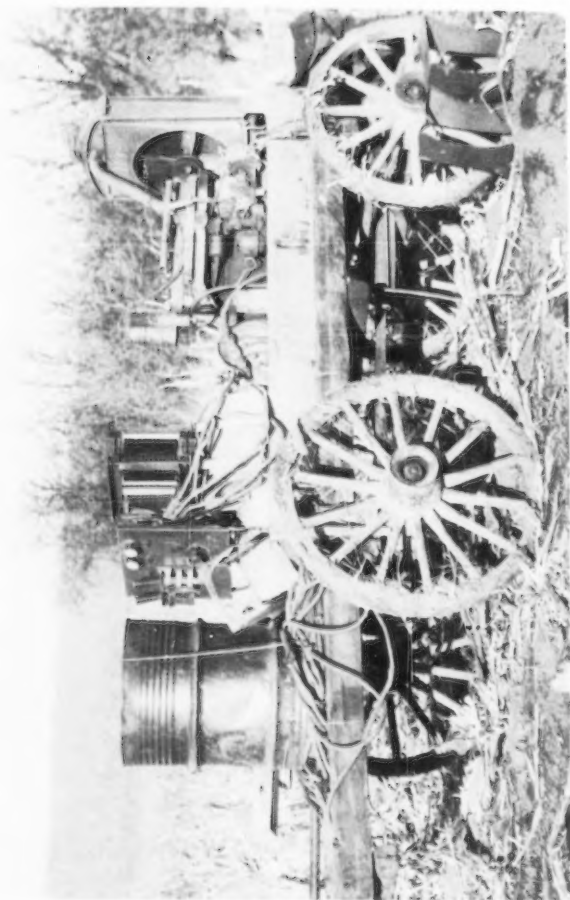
Electric arc welding rig used in 1920 and 31
